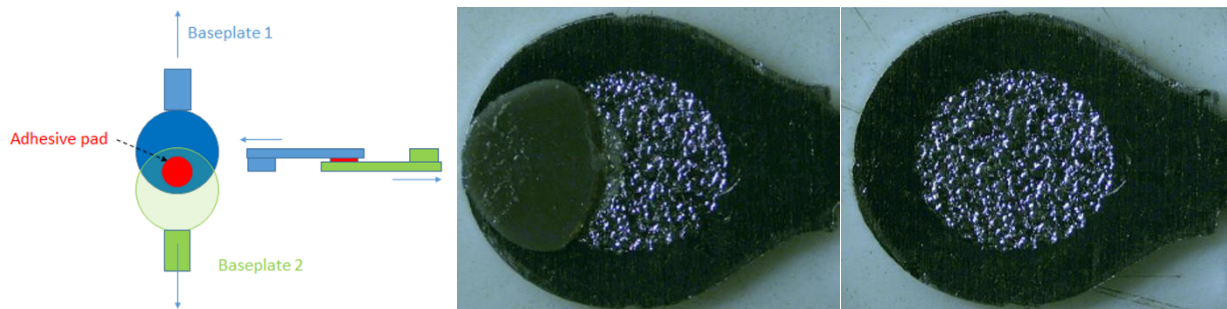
Test samples geometrical configuration (left) and example of failure of adhesive type (centre and right)
